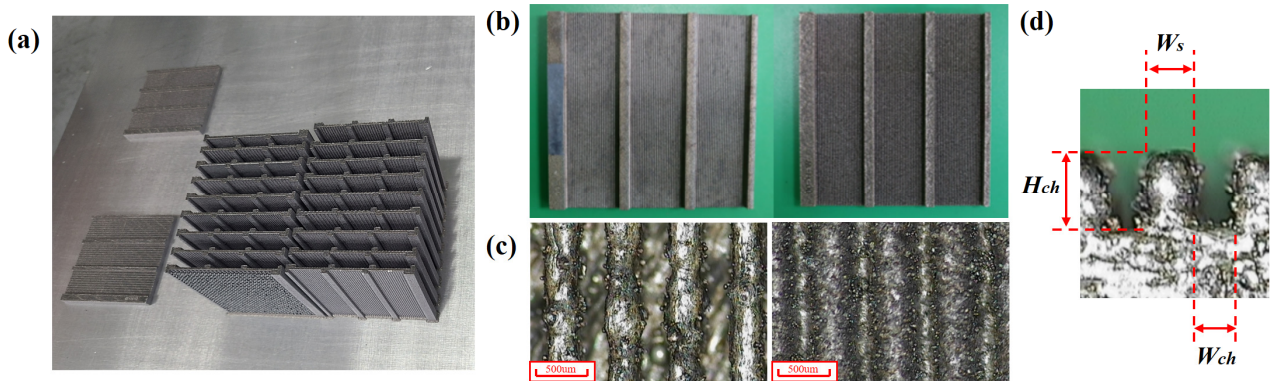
(a) Fabrication of grooved wicks by printing directions, (b) grooved wick samples, (c) optical microscopic image of grooved wicks (left : sample no. 1, right : sample no. 2), (d) geometries of the grooved wick
